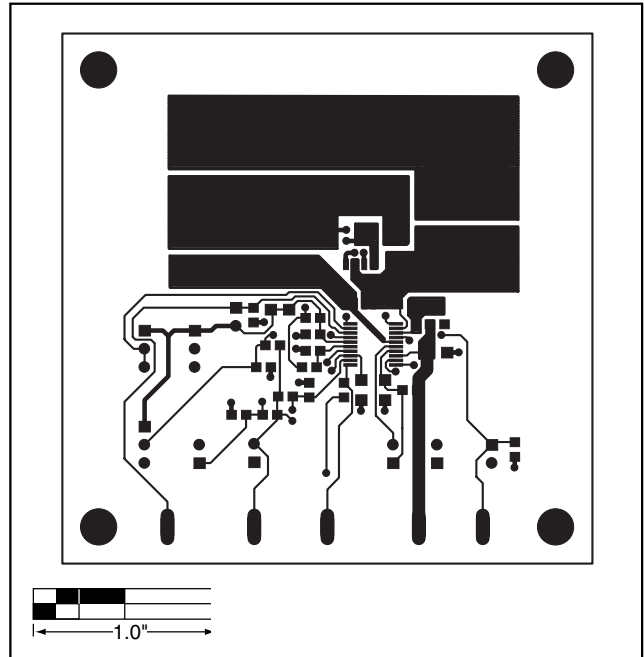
MAX1844 EV Kit PC Board Layout—Component Side
